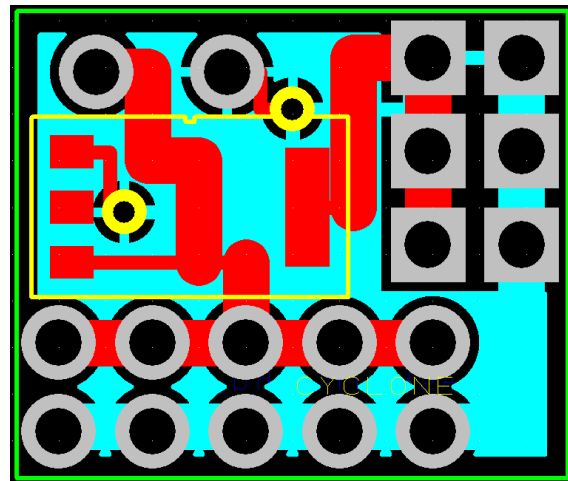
Power Distribution PCB (designed using DesignSpark PCB⁴)
